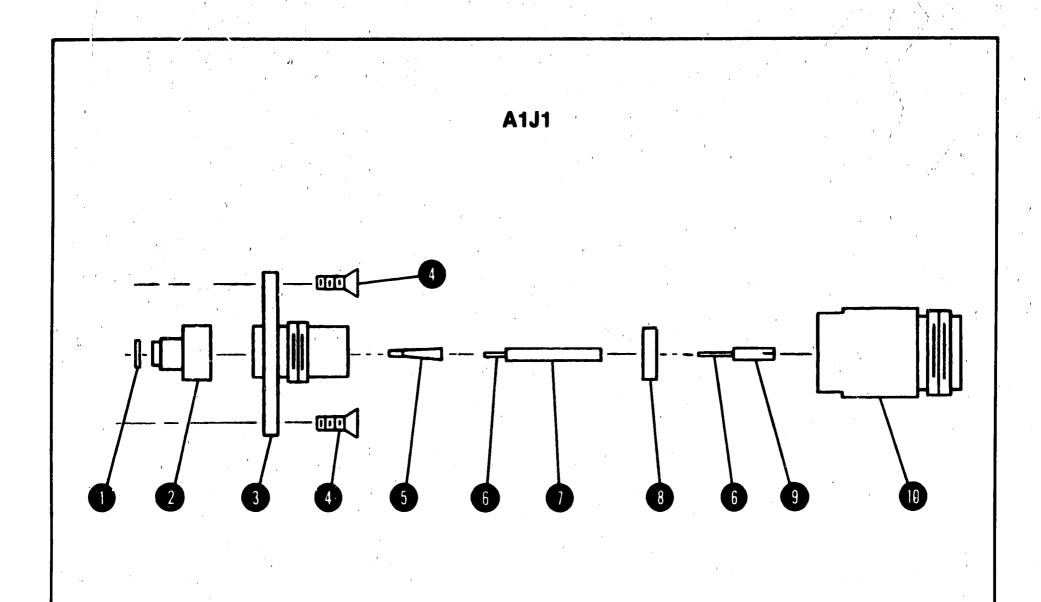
Type N 50-Ohm Connector Assembly, Exploded View
